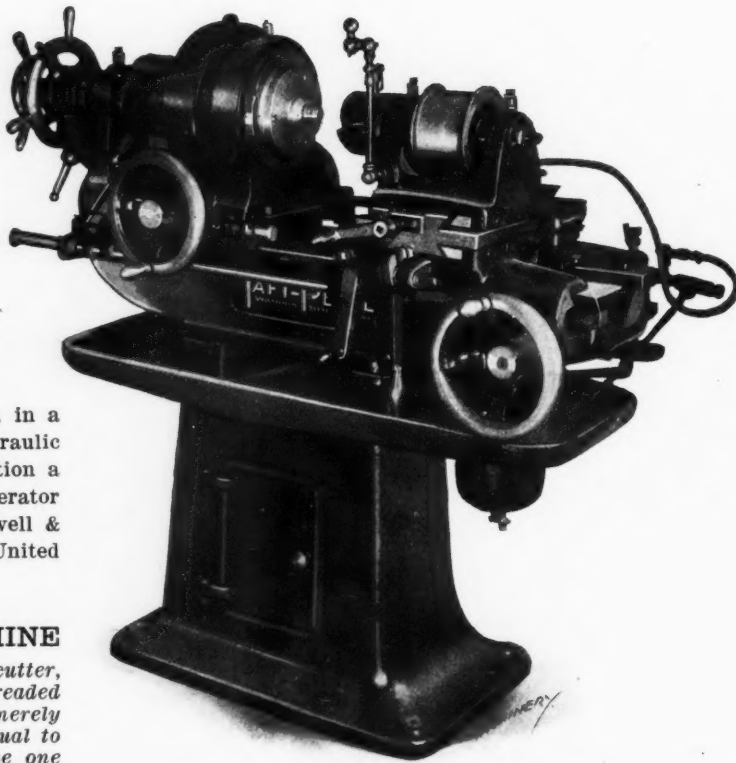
End View showing Arrangement of Slides on Cutter-head
